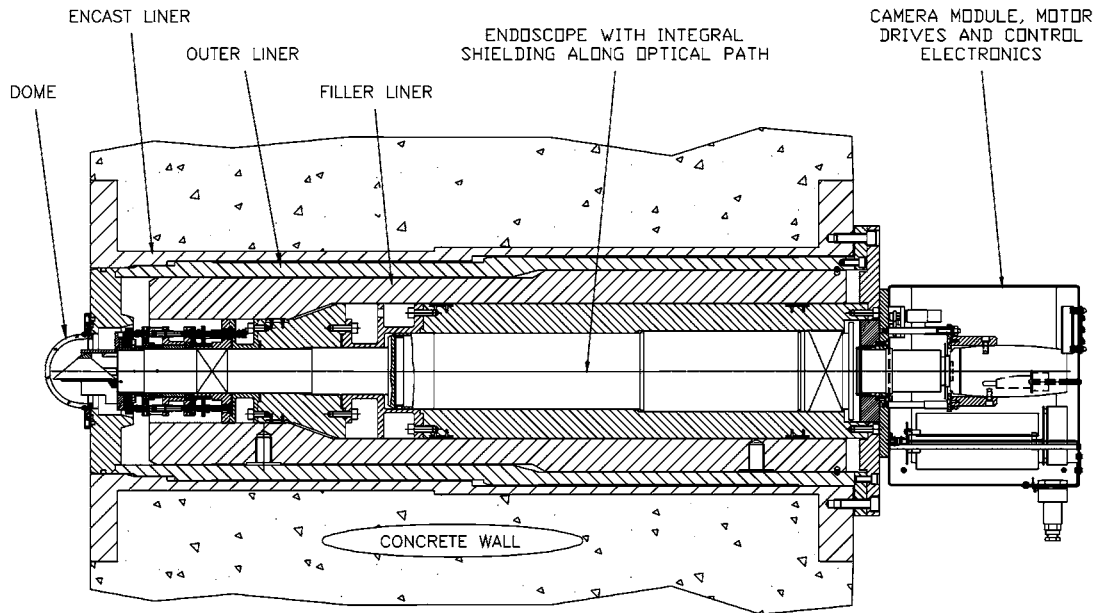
Typical Through-wall Camera (Cross Section View of Encastrated Liner and Filler Liner Shown)
